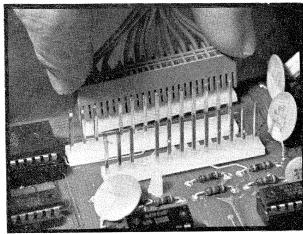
Connect Cable #9 to J6 on the Playback PC Board.
